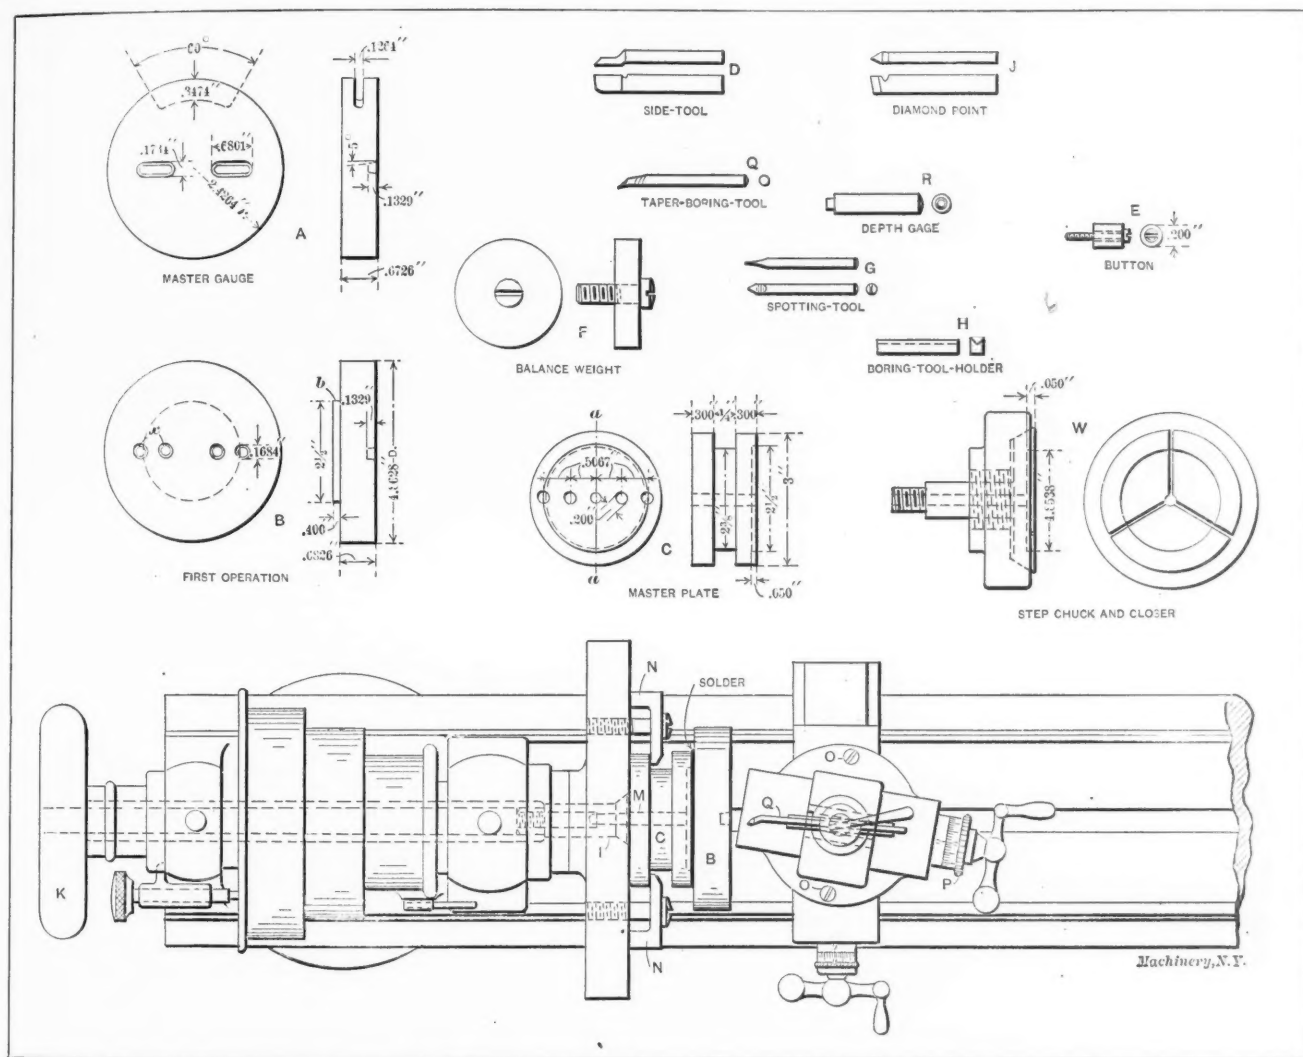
Plan View of the Bench Lathe arranged for Boring the Tapered Holes in the Face of the Gage, and Miscellaneous Tools
